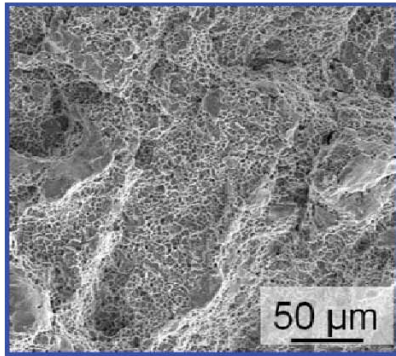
SEM Fractographic examination of the welding test with YGW-11 filler wire, full constraint, and a root gap width of 2 mm.
